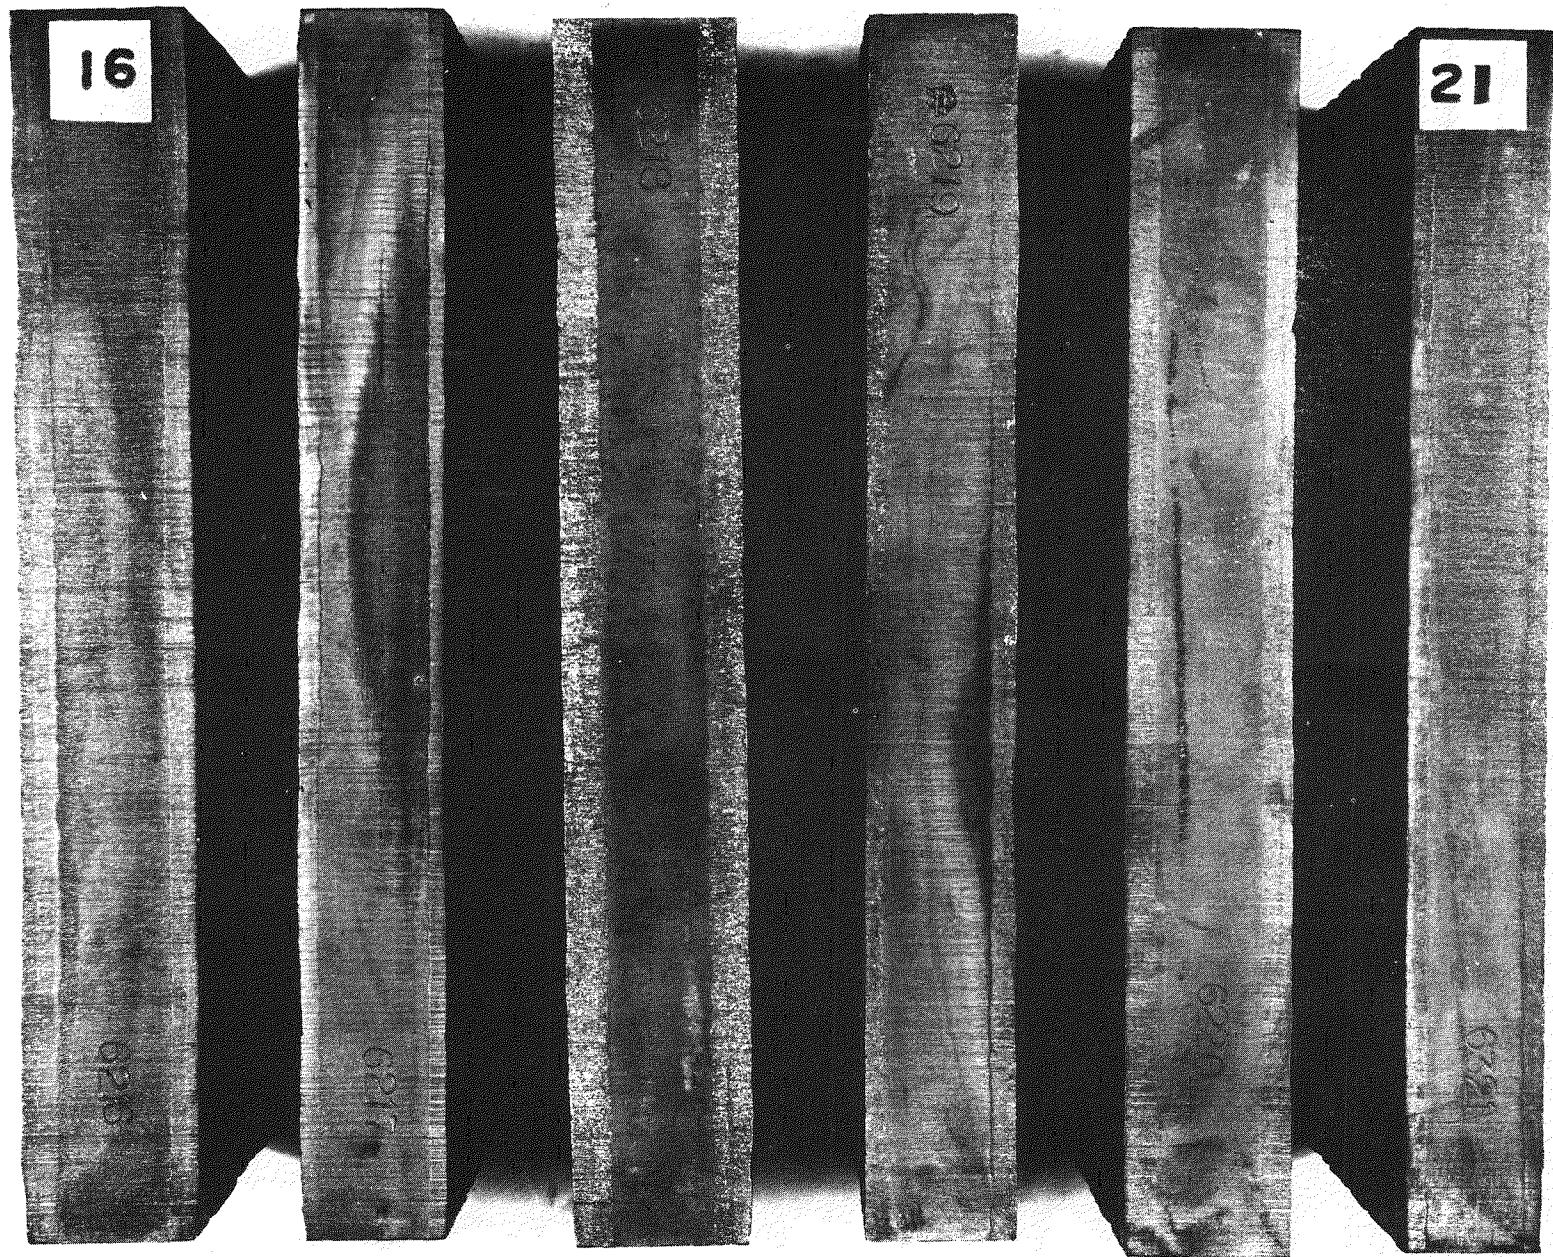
Edge view-Filler Metal R139-310SS weldments after exposure.
